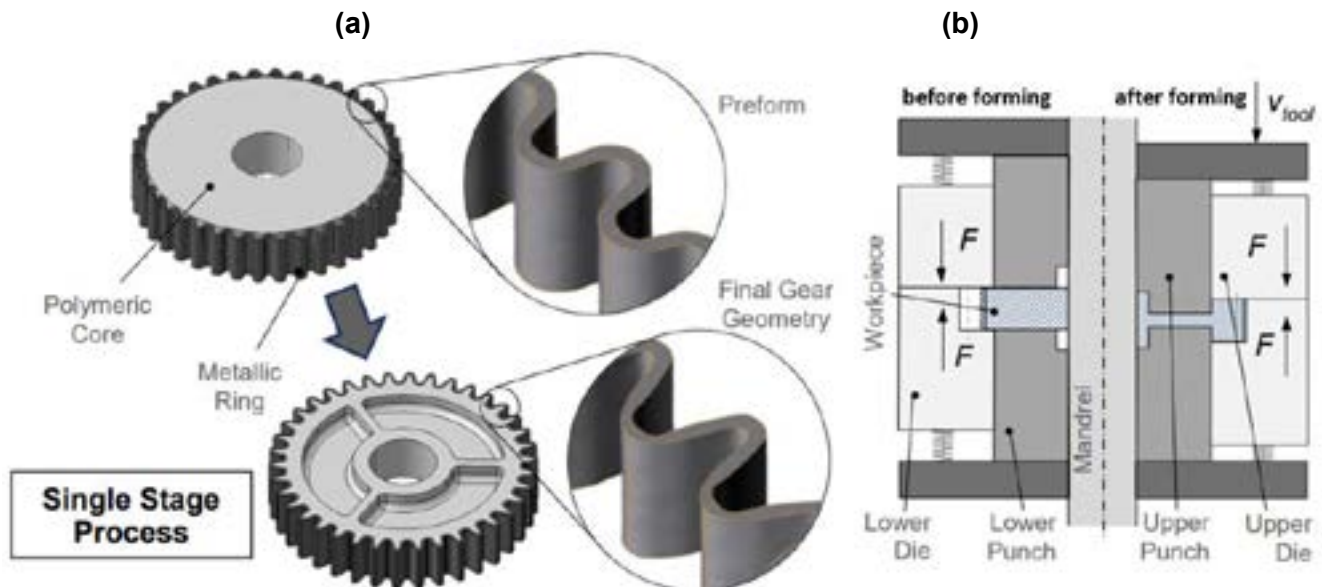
Process principle for hybrid manufacturing of spur gear. (a) Billet materials and targeted component; (b) schematic tool concept before and after forming.
